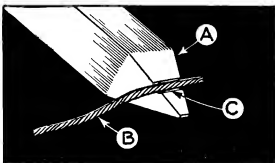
The control cable (B) is shown in groove (C) of tinned face of soldering iron head (A). An ordinary file will serve to make the groove. The groove should not be sharply "V'd" as the cable would not contact the surfaces.
